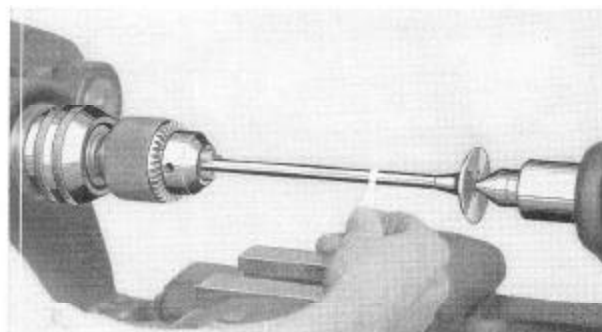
Valve Head Supported on Tailstock Center for Locating the Exact Point where Valve Stem is Bent.
